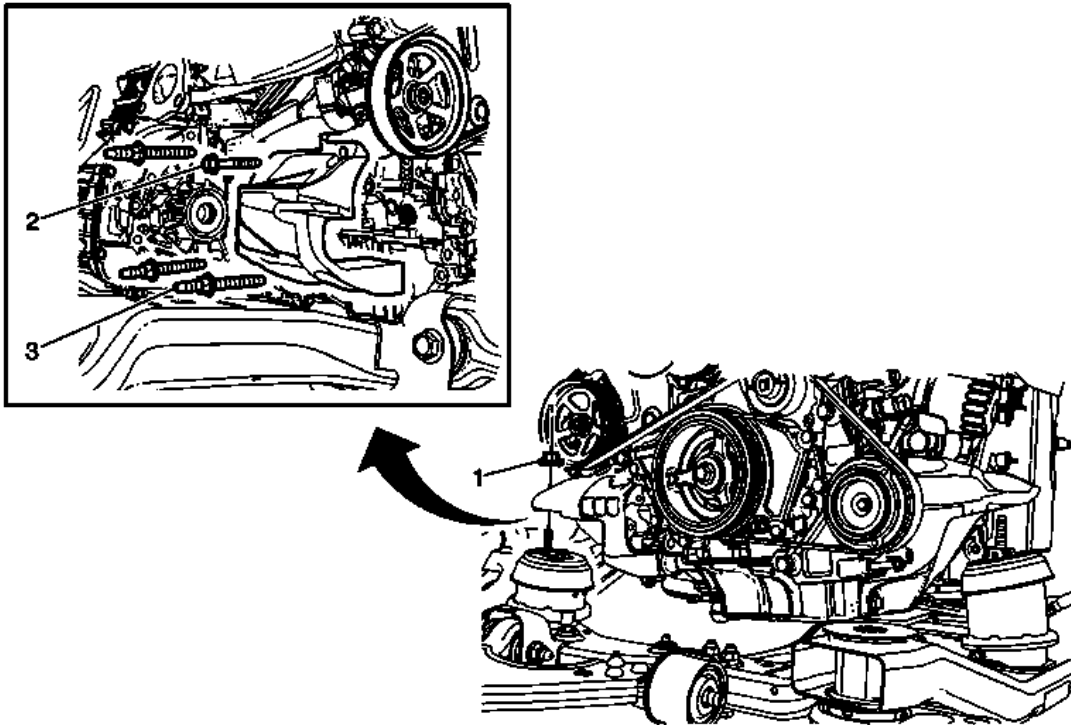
Identifying Engine Rear Mount Bracket (Front Wheel Drive)
